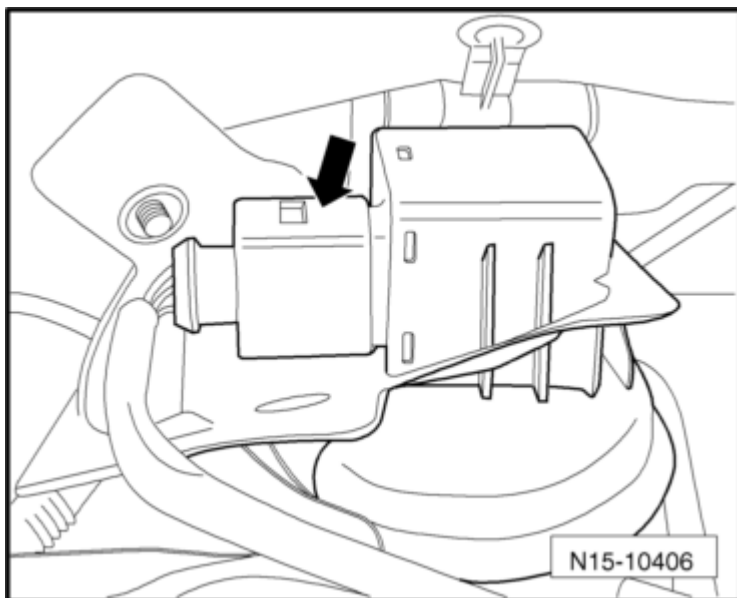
Identifying Connector To Charge Pressure Actuator Position Sensor -Arrow-
